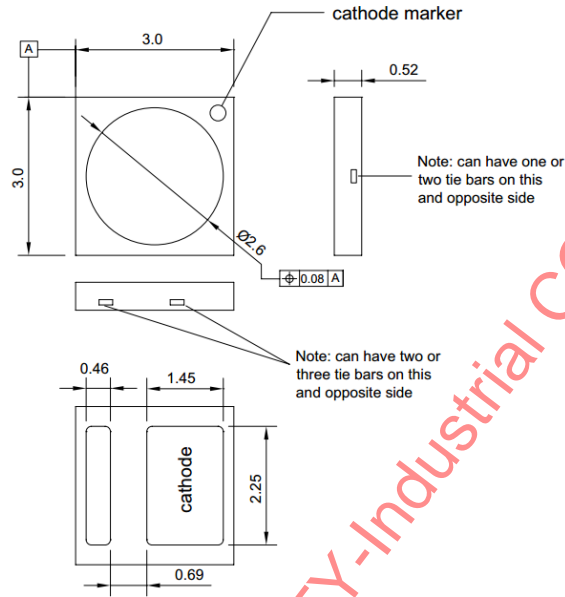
Mechanical Drawing for LUXEON 3030 2D. All dimensions are in millimeters.
